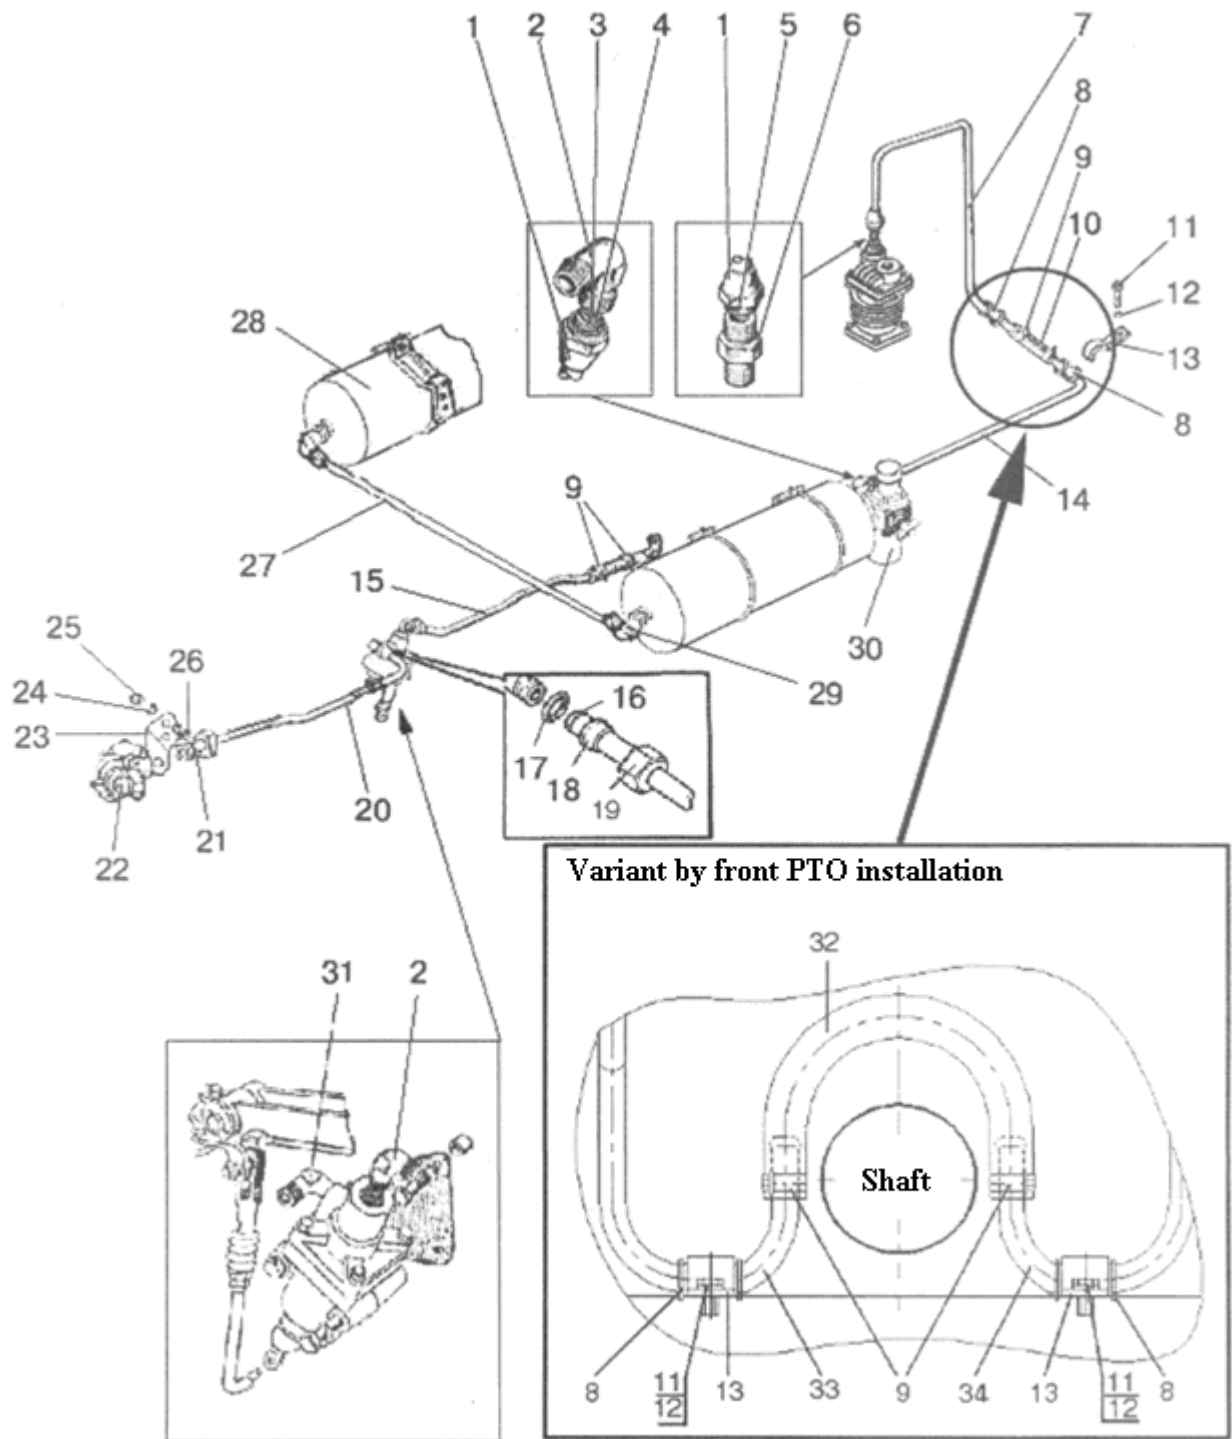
Pipelines and fittings of of the single-wire pneumatic drive of the trailer brakes
